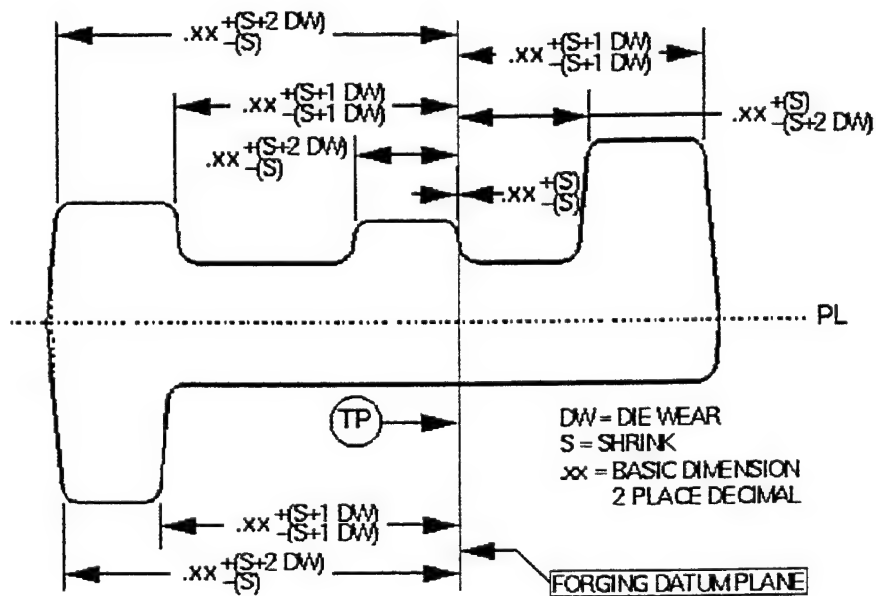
Shrinkage and Die Wear Tolerance Application for Large Forging with Datum Plane Inside Forging
